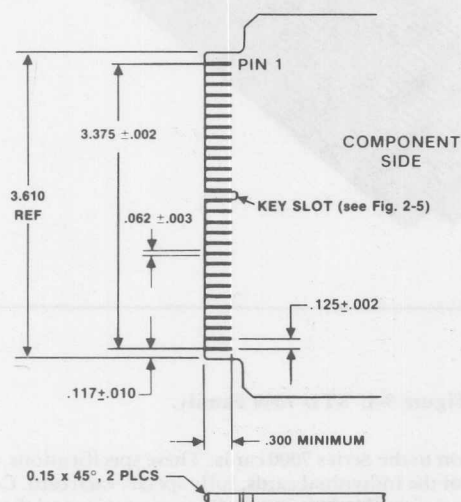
STD BUS Edge Card Finger Design - Inches.
